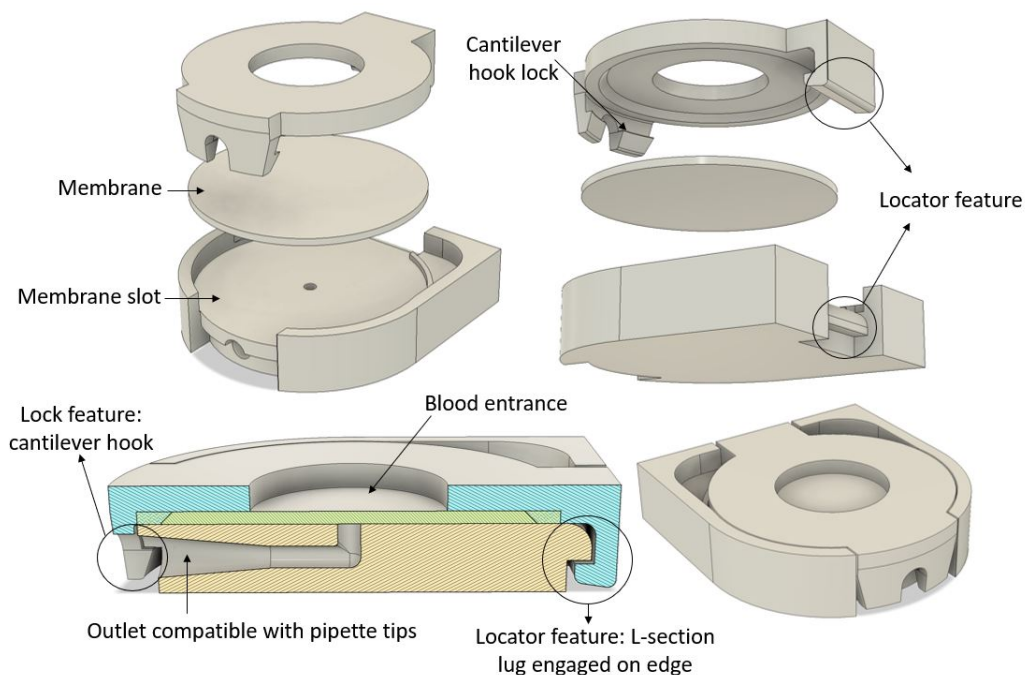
Cross-section, top, bottom and exploded view of the final iteration of lock-based snap-fit devices. When engaged, the cantilever hooks hold the top and bottom parts together while compressing the edges of the membrane to prevent spills towards the outlet.
